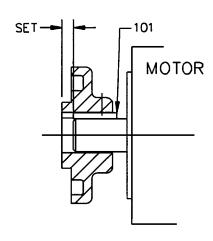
Model GTN, GTNC, GTNS Agitator Assembly
